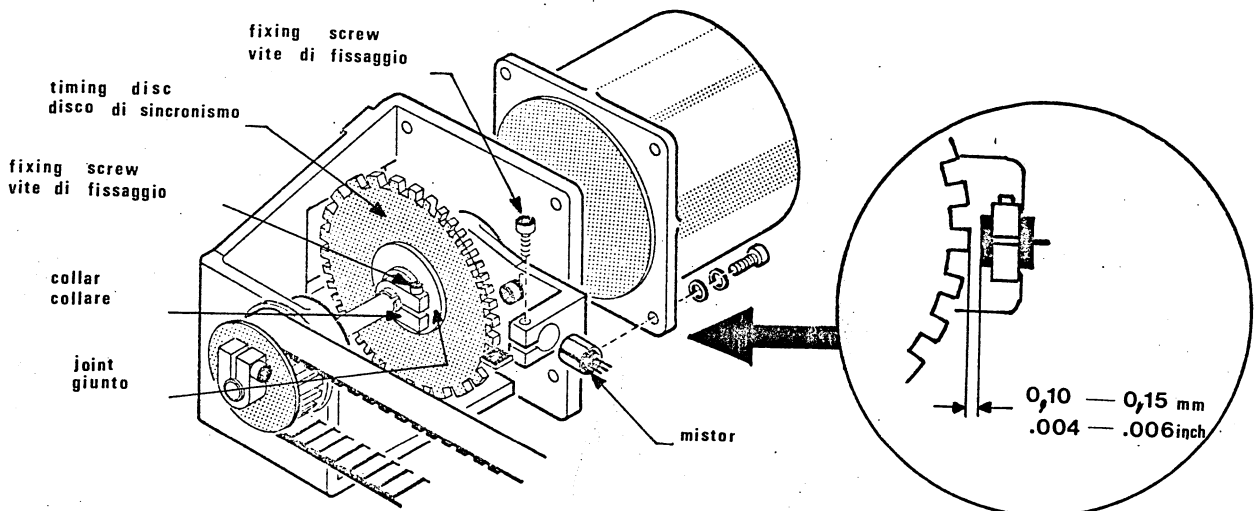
MINA Mechanism Motor/Mistor Support Assembly
